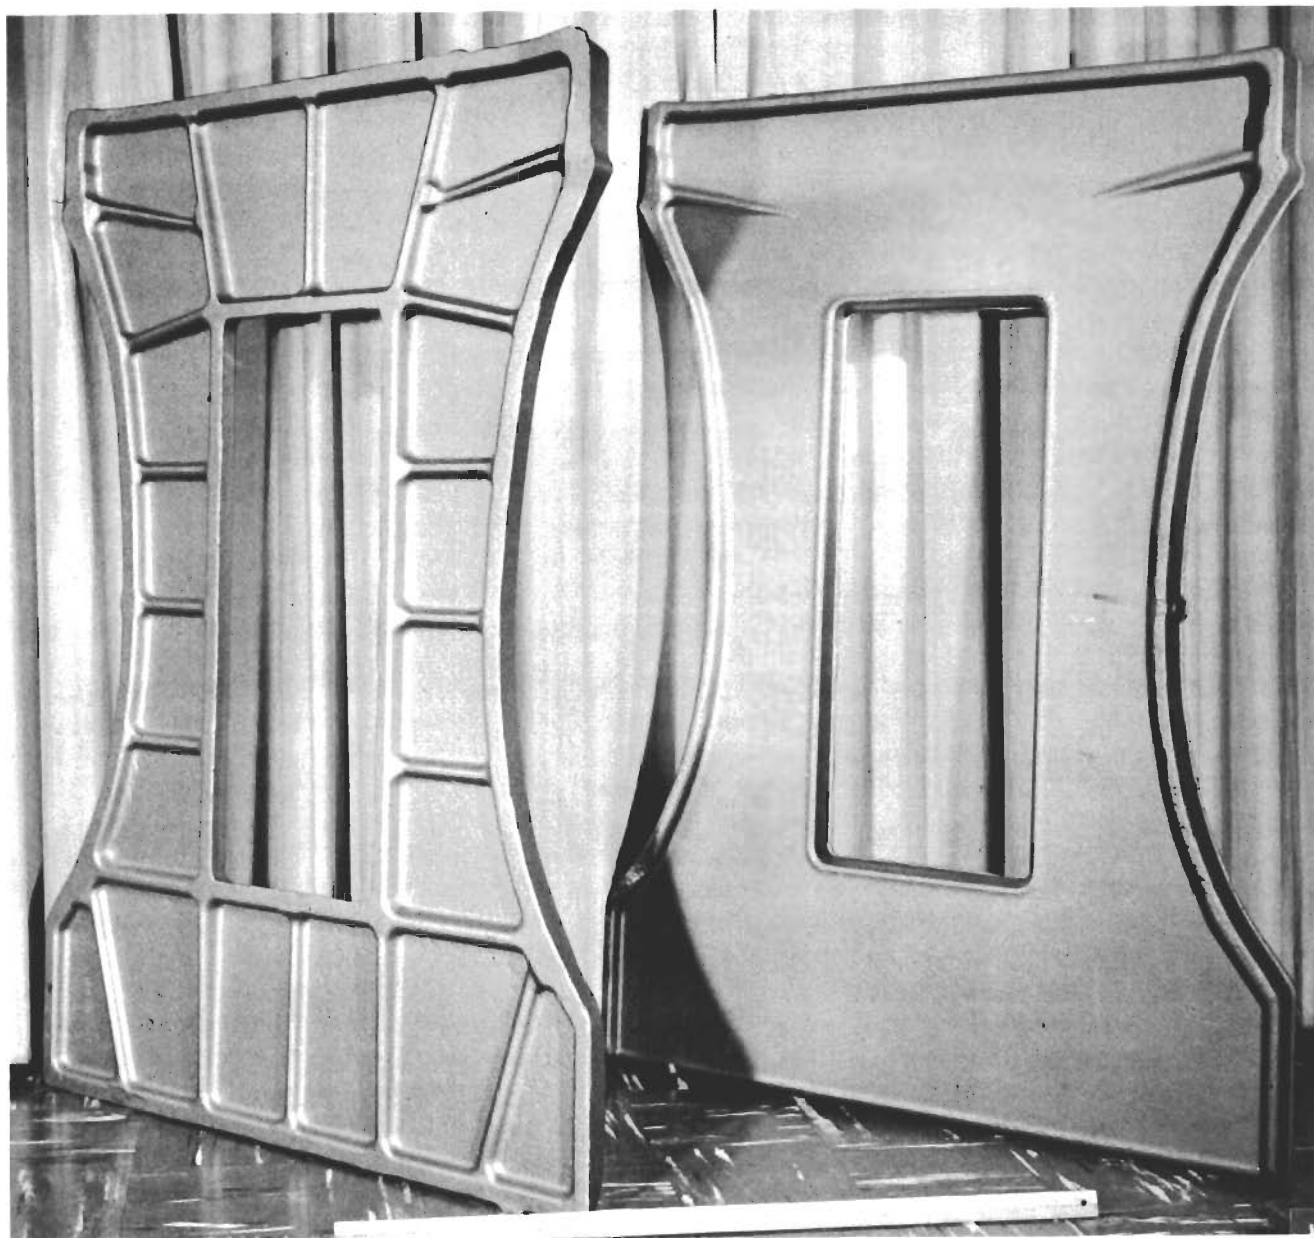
Two High Strength Steel (D6ac) Bulkhead Forgings Produced During Initial Die Try-Outs with 125,000 MKG Counterblow Hammer. Surfaces Shown for Forgings at Left and Right Represent Upper and Lower Die Impressions, Respectively, Shown after Trimming and Abrasive Blasting.
